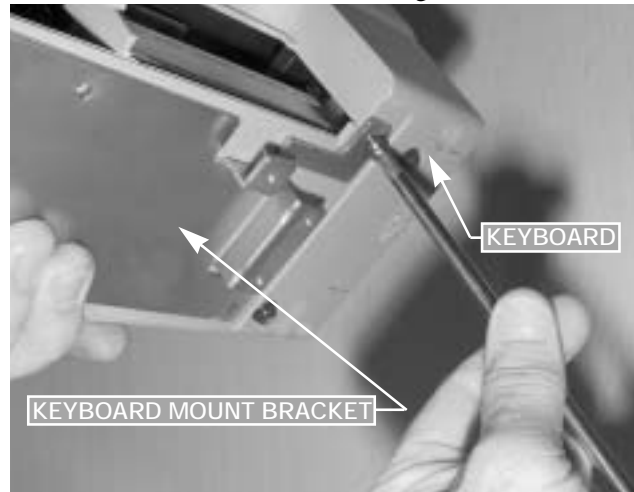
Attach Keyboard to Pole Mount Assembly
